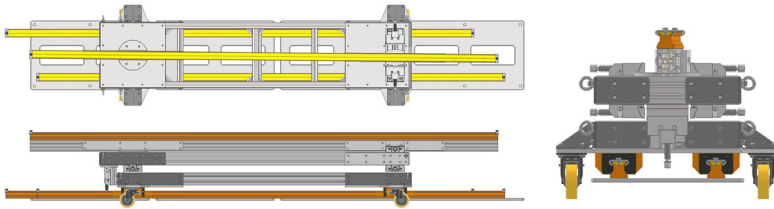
Design concept of the mobile platform for placing a modular beam dump with a reinforced steel monorail.
